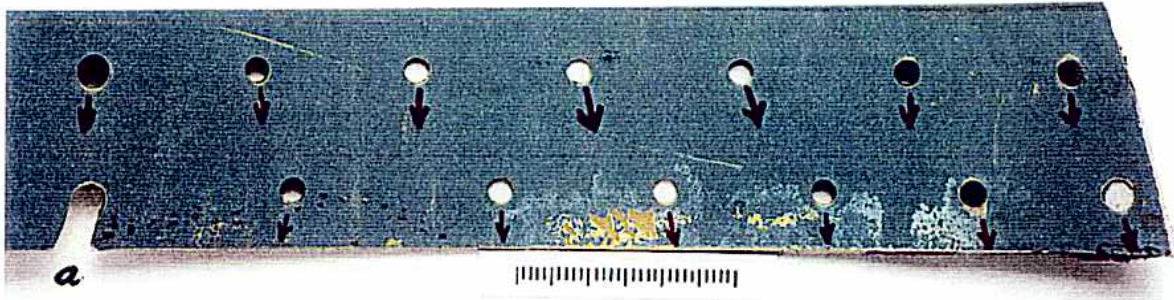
Interior surface location from the R/H side upper surface of the rear tail boom unit, representing the rivet joint in question. Bore edge deformation is marked by red arrows.
